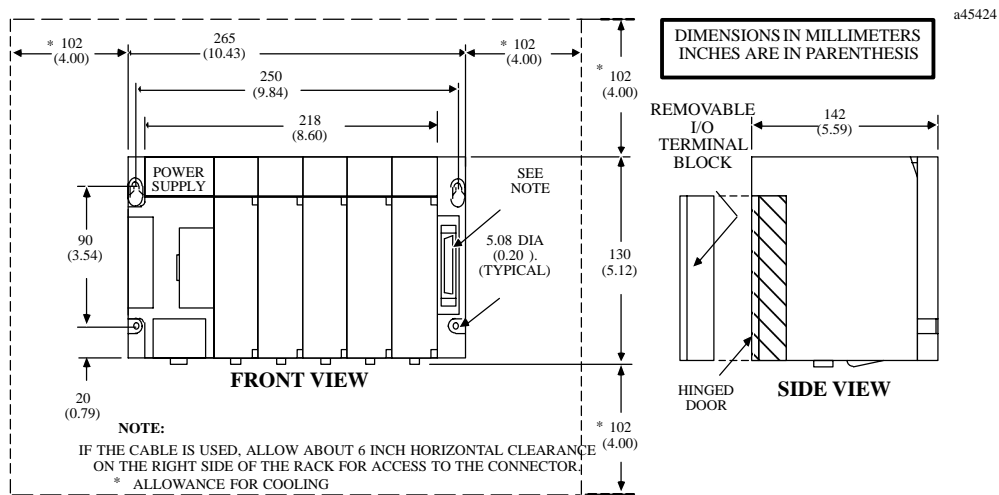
5-Slot Baseplate Mounting Dimensions and Spacing Requirements
